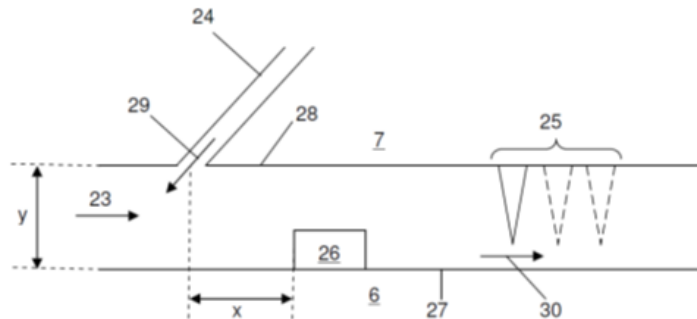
Patent: Seal Assembly, Possible Seal Configuration A
